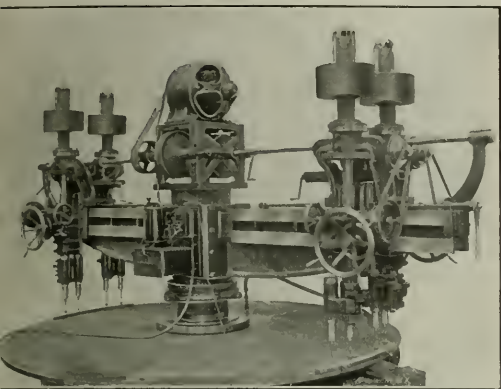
Special Double-head Radial Drill Driven by 10 H.P. Motor Working on a Turbine Disk.
